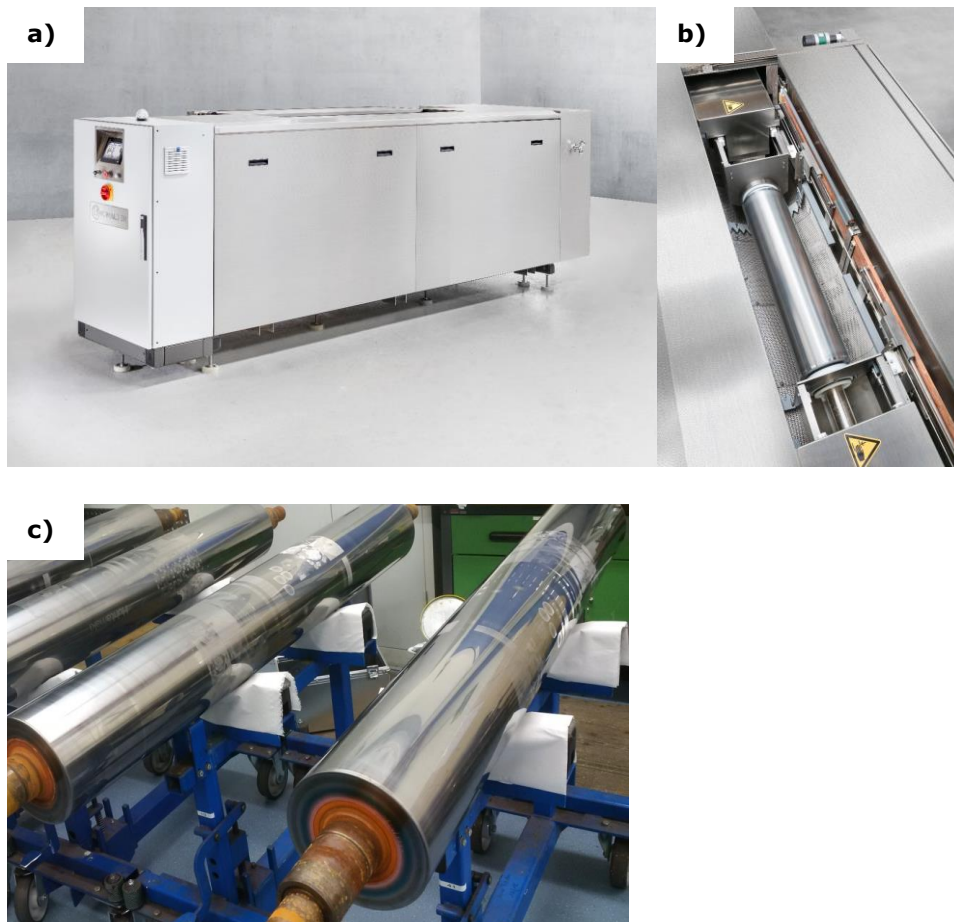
a) Outside and b) inside view of electroplating machine. c) Engraved printing cylinder.
